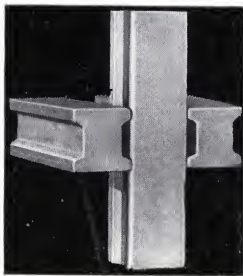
Showing picket and rails as assembled in jig, before passing through jaws of Electric Welding Press.
